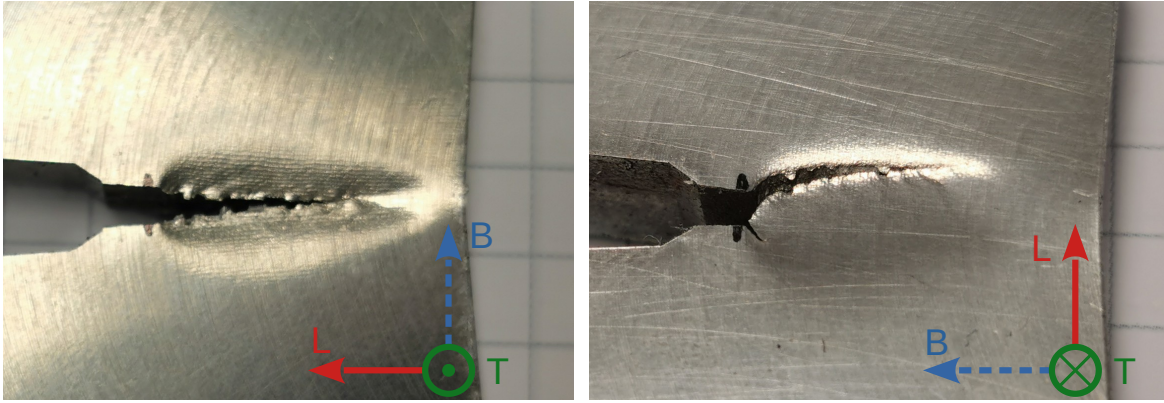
Macroscopic aspect of the cracks obtained during the fracture tests. Left : // specimen, Right :  $\perp$  specimen.
